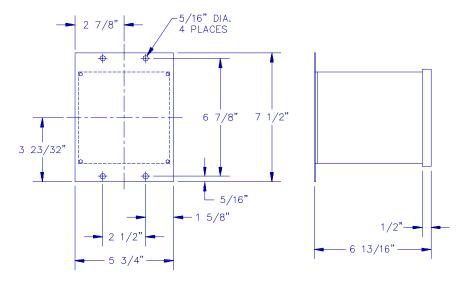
NEMA 4X Rear Cover & Surface Mounting
